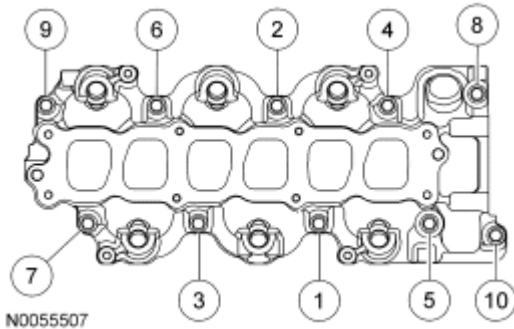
Installing Lower Intake Manifold Bolts In Sequence
